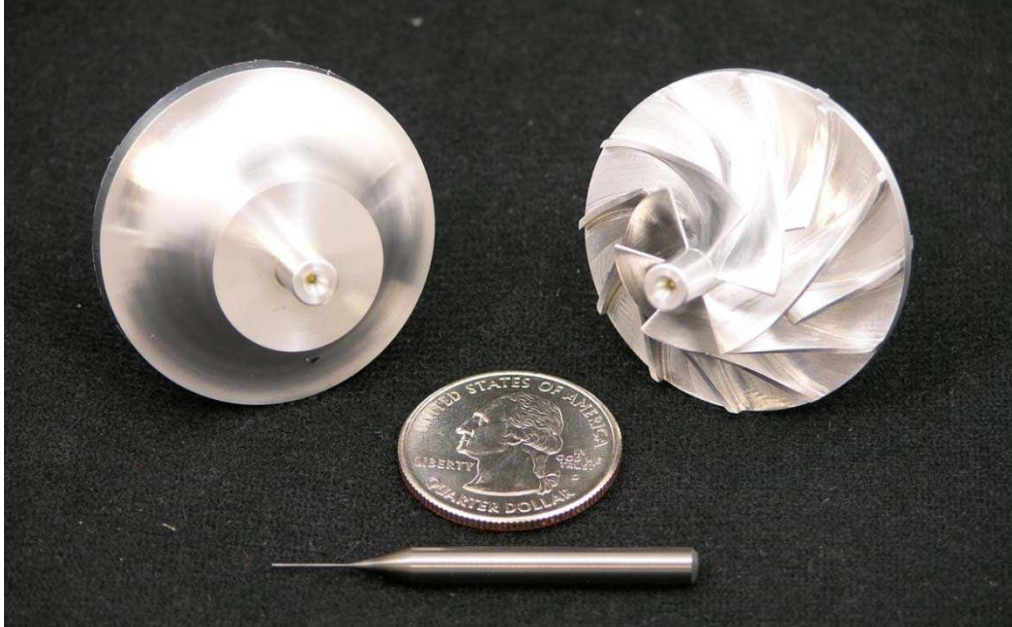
Nine S-CO₂ compressor wheels have been fabricated. This image shows the compressor wheel blank, the finished wheel, and one of the tools (not the smallest) used to machine the wheel.
